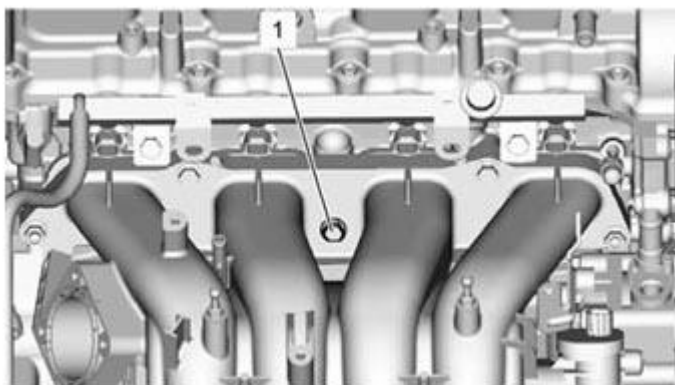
Removing Intake Manifold And Intake Manifold Gaskets From Cylinder Head
